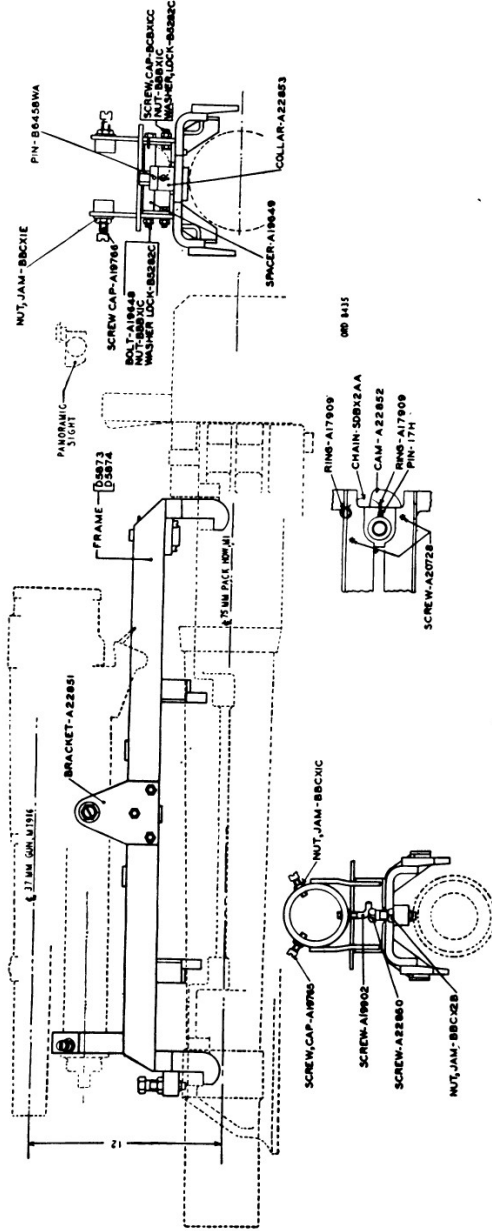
Mount, subcaliber, 37-mm, M1916.
